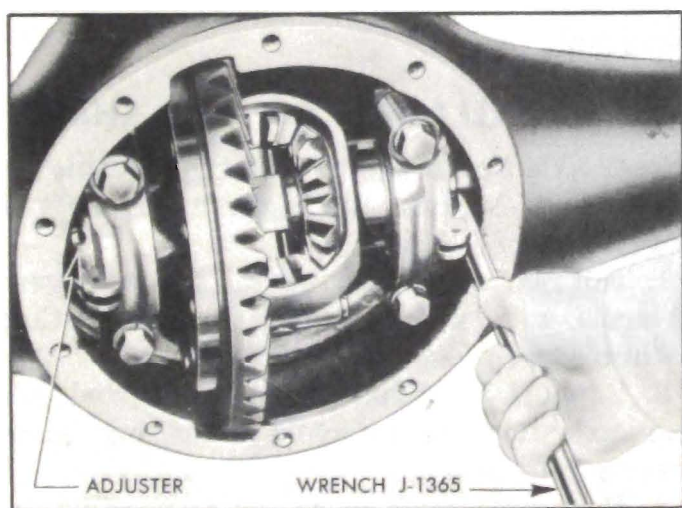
Adjusting Differential Bearings with Wrench J 1365
